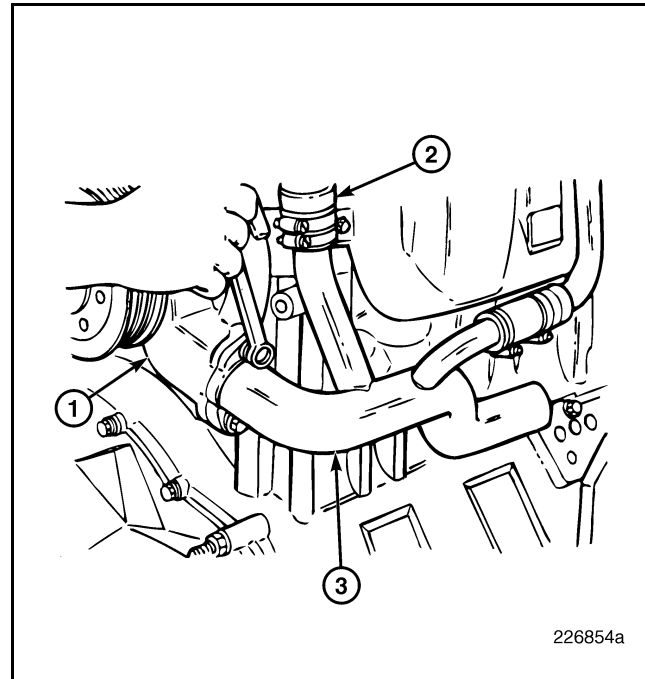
Oil Cooler-to-Water Pump Inlet Line Removal
